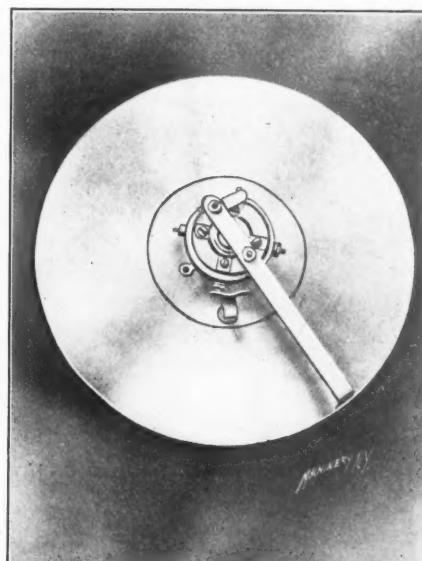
Fixture for Testing the Accuracy of Commutator Contact Points
